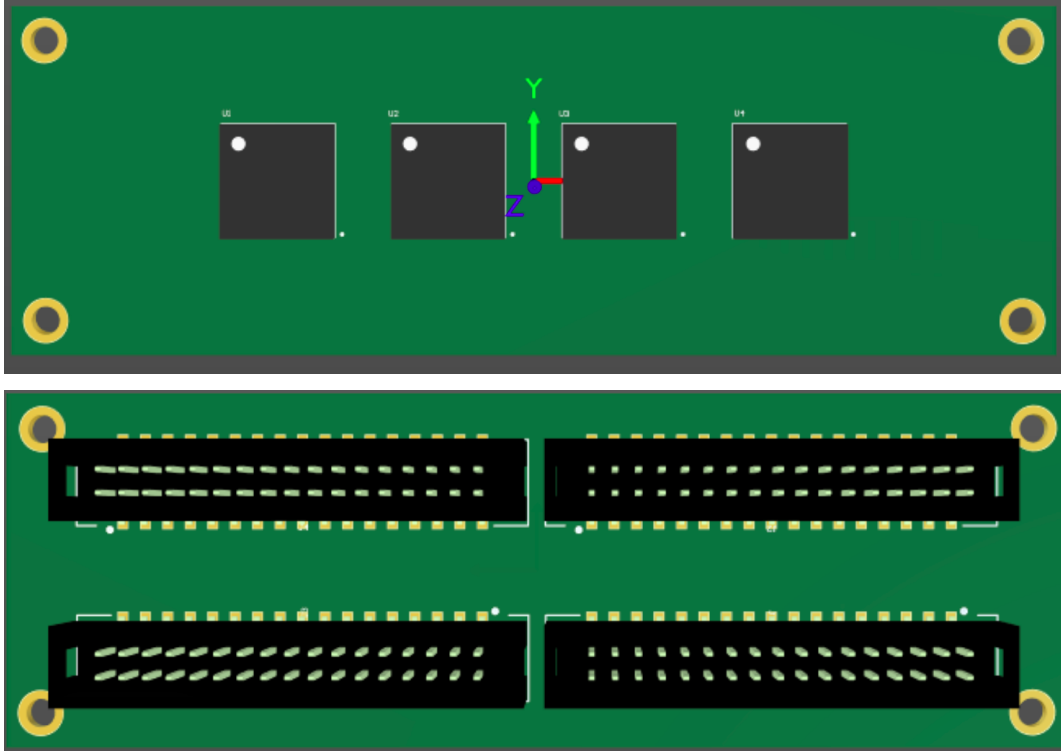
Rendering of the front and back of a 4-pad SiPM PCB board. SiPMs are soldered to the four pads and signals from the SiPMs exit the back of the board through the four ribbon cable connectors.
